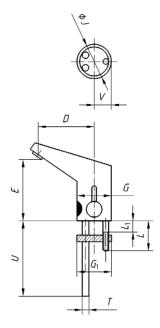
Mixing valves for horizontal mounting Figure 8 — Mixing valves for horizontal mounting, threaded inlet stud connection
